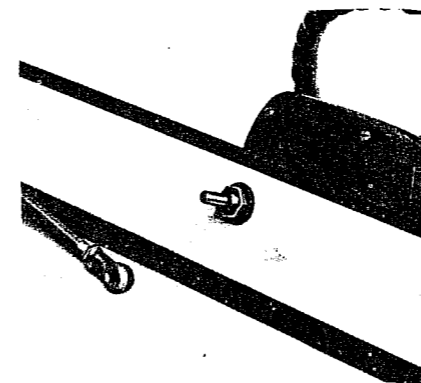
Wiper arm connecting rod detached on Type 181 models.
